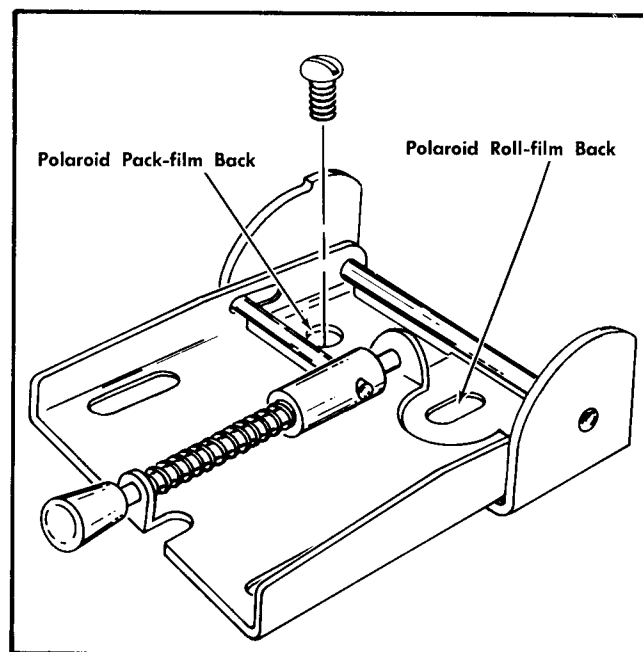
Selecting proper mounting hole in Power Supply Mounting Bracket.
